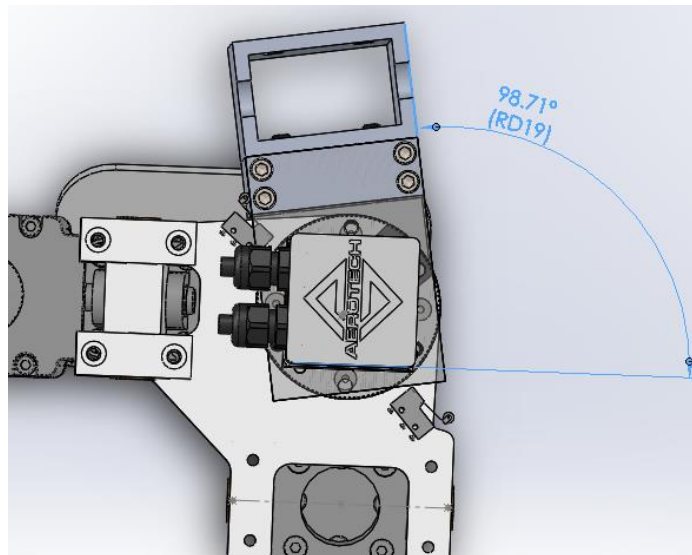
Cad model of AFS ankle mechanism during extreme Yaw position.
